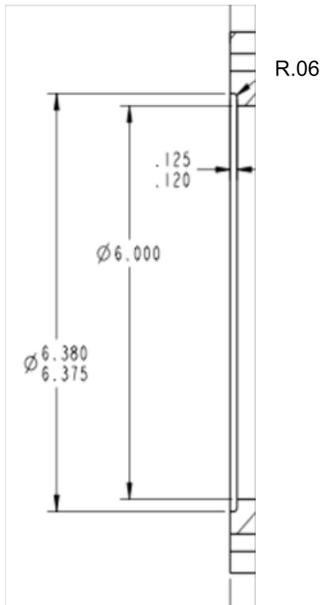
PARTID DS2TJ—REFERENCE DRAWING OF UPSTREAM FLANGE DETAILS FROM SIMILAR PART
